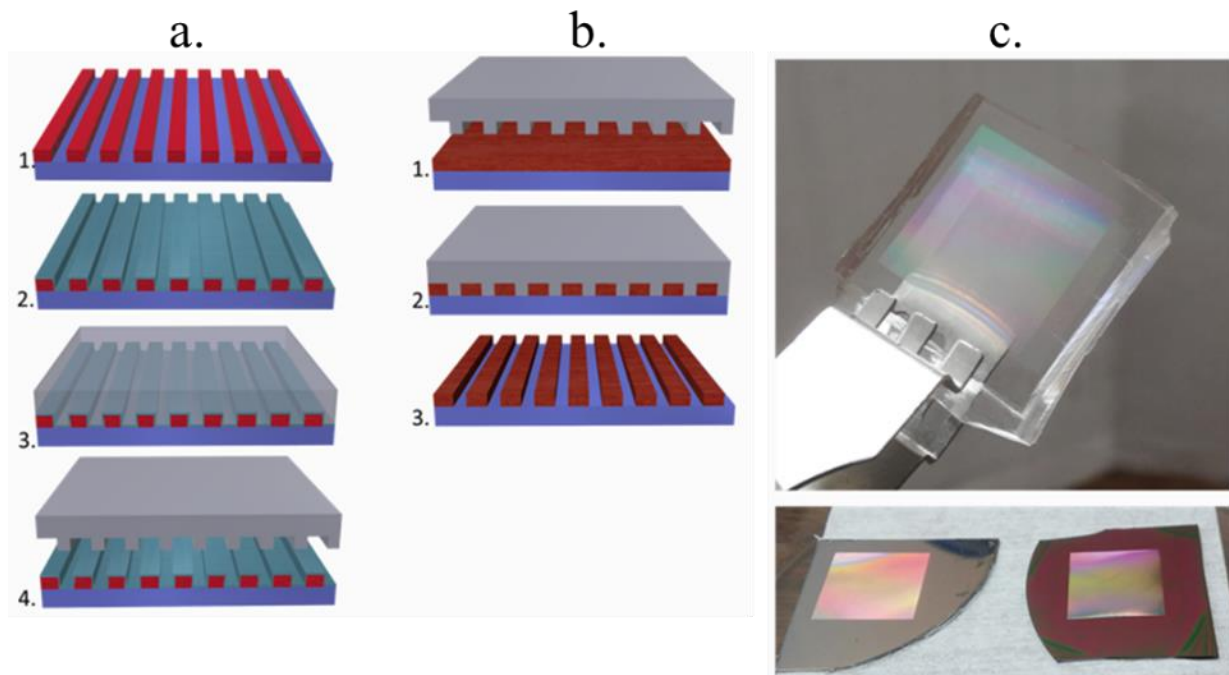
Nanostamp fabrication and photoresist imprinting process. a) PDMS stamp creation. b) Photoresist imprinting. c) fabricated PDMS stamp, aluminum coated master template, and stamped photoresist.
